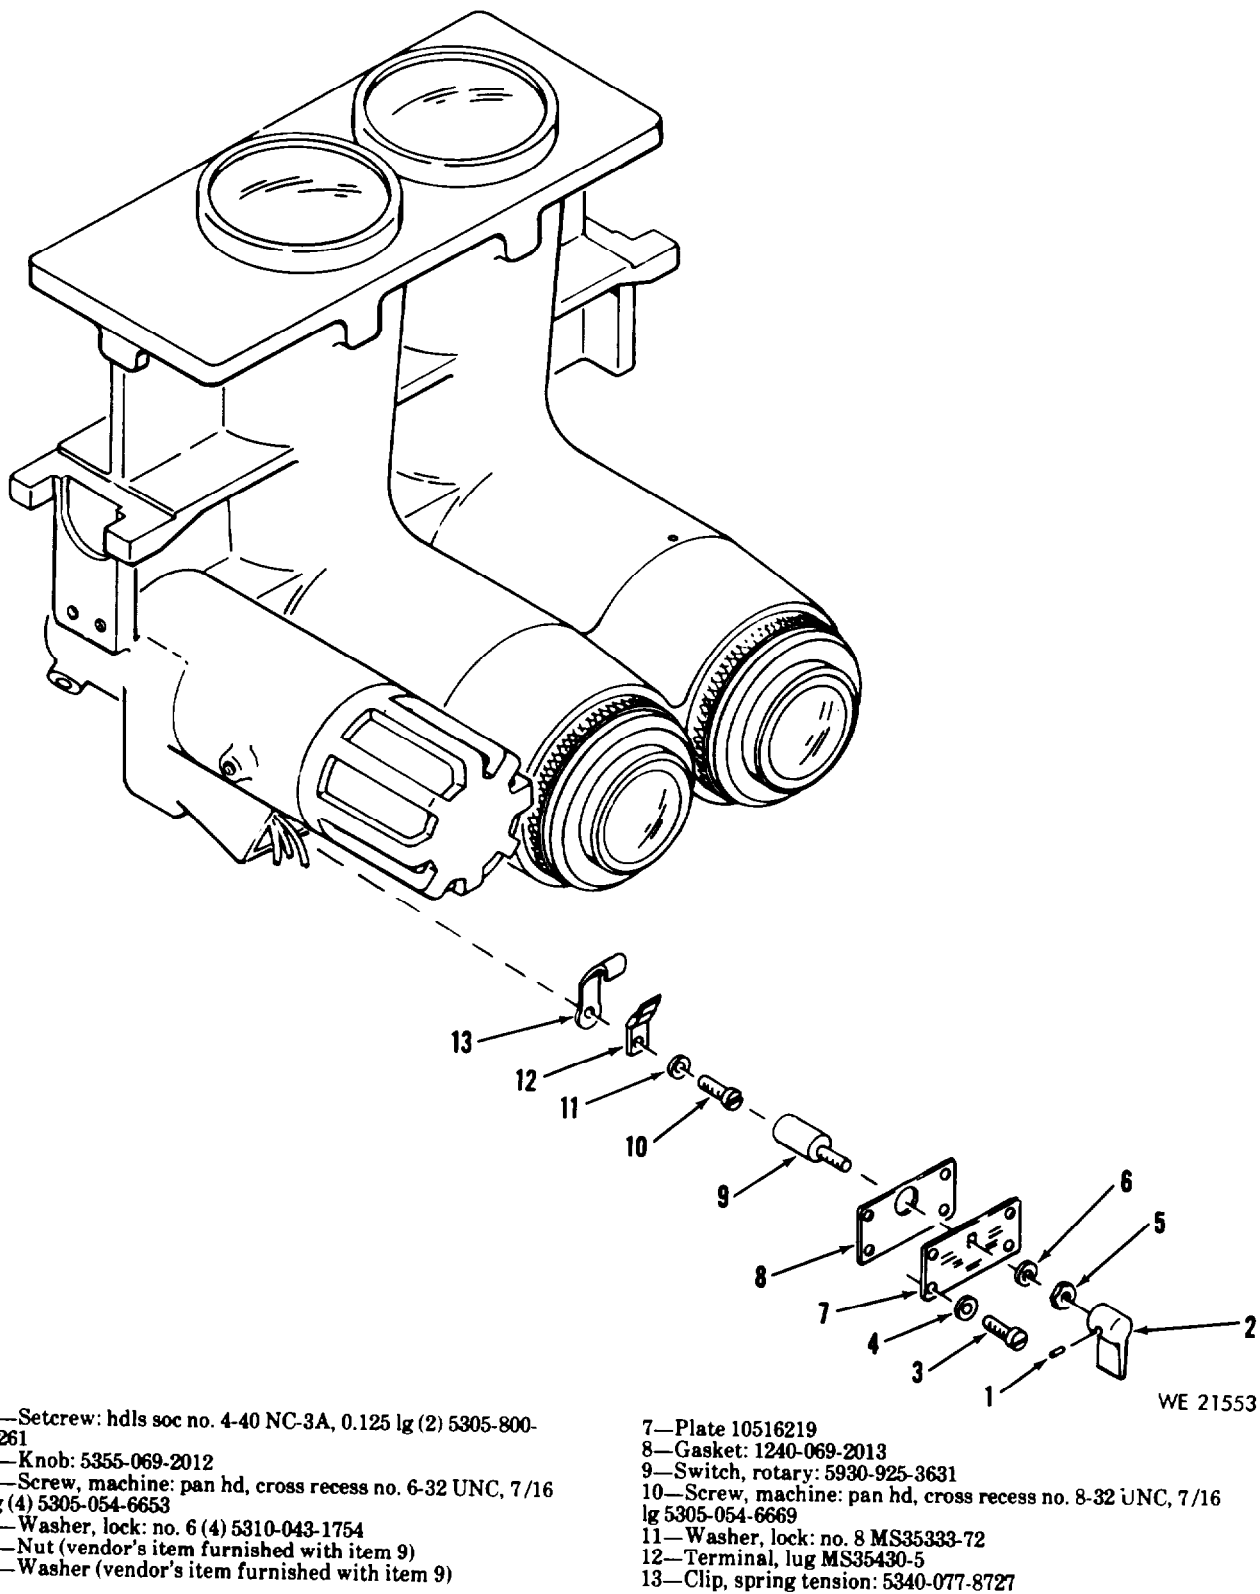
Rotary switch 5930-925-3631 and related parts—partial exploded view.
